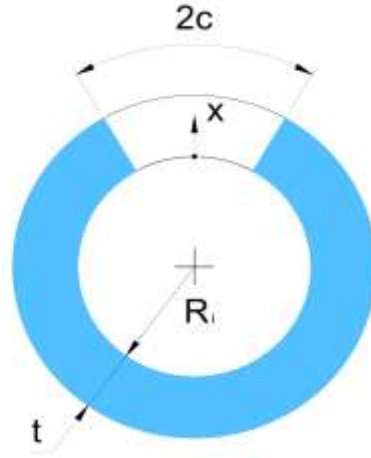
Through-Wall Crack of a Cylinder, Circumferential Direction, as Provided in Annex 9B of API 579-1/ASME FFS-1 (Adapted from [13])
